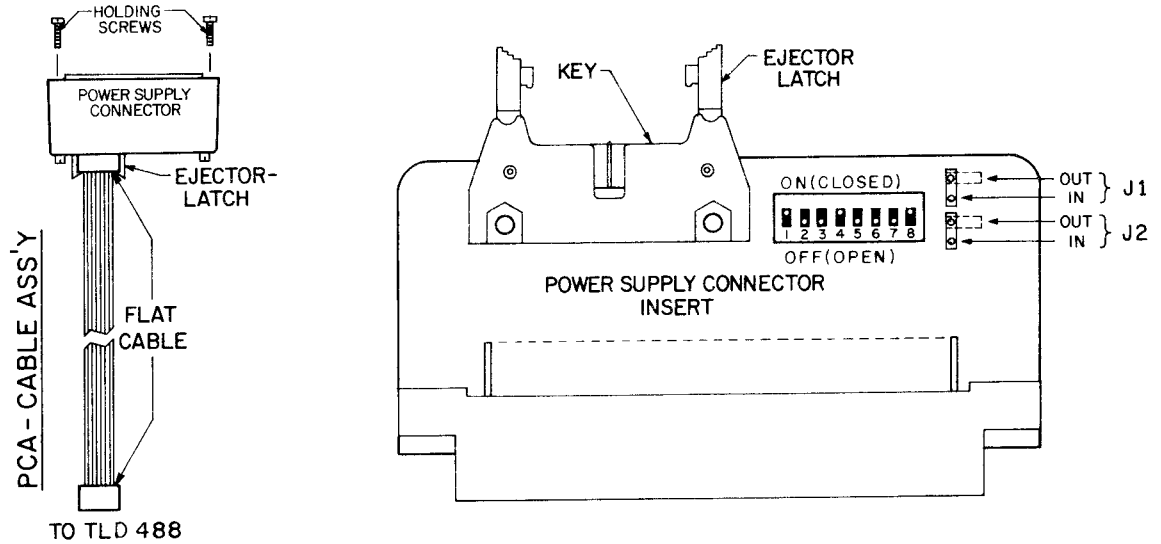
PCA CABLE ASSEMBLY AND POWER SUPPLY CONNECTOR INSERT DETAIL, TOP VIEW.
